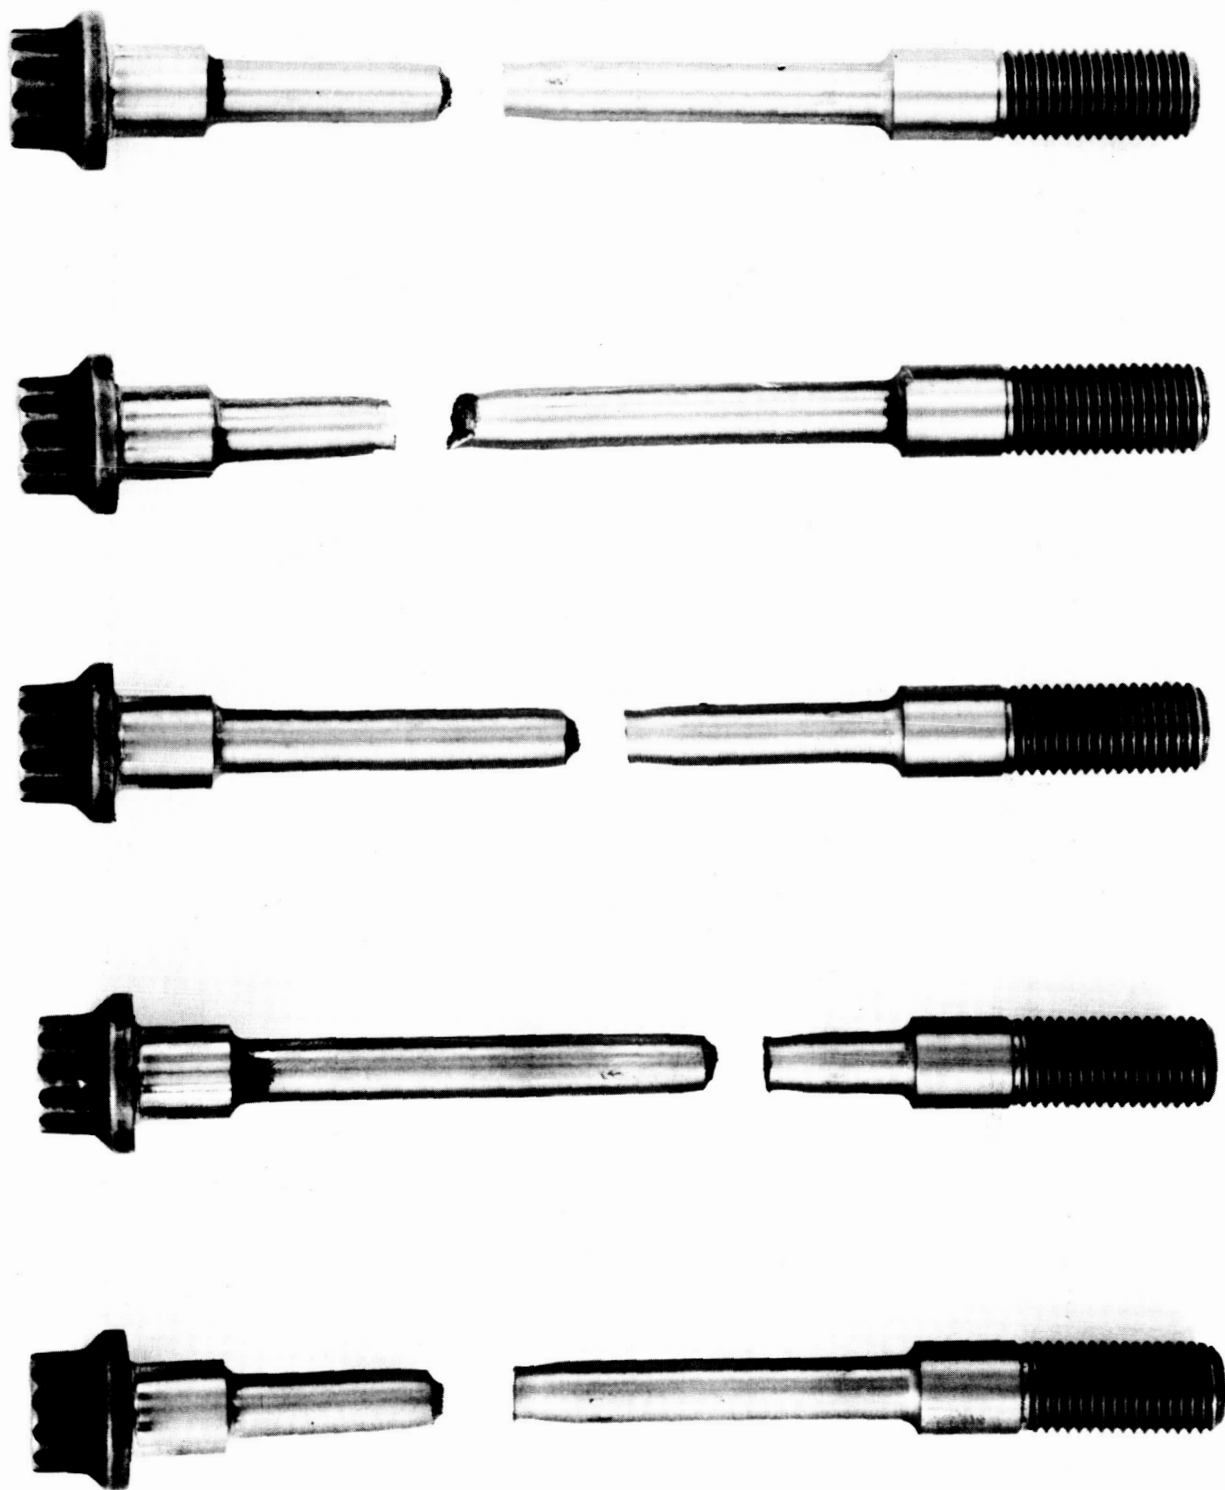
B A-286 REDUCED SHANK BOLT SPECIMENS
